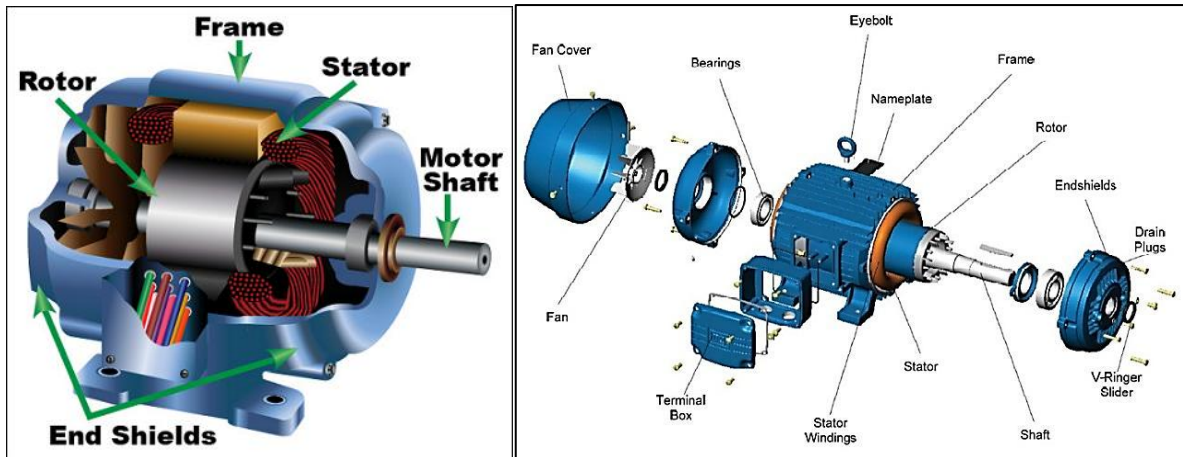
A cutaway basic parts description (left) and breakdown detailed description (right) of a typical three-phase induction motor (Source: Electromotors WEG SA, Brazil [73])
